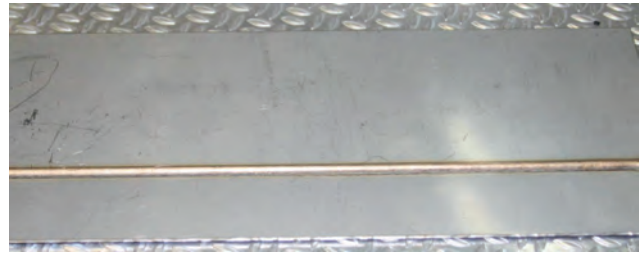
Butt welds with 2.5 mm thick OL 37.1 plates.
